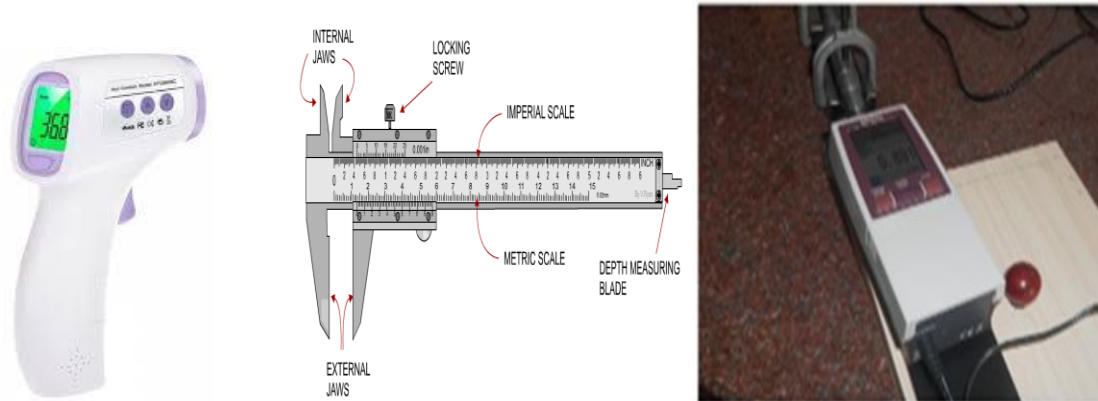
Infra-red Thermometer, Vernier Calliper, and Surface Finish Tester.
